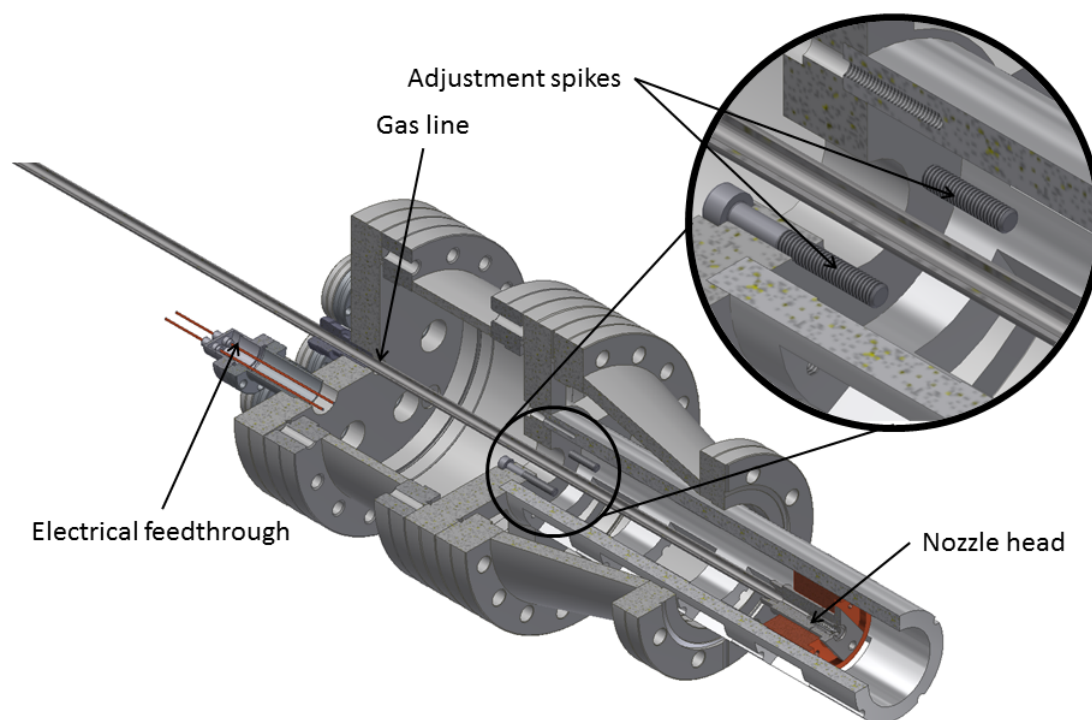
Schematic representation of the adjusted nozzle mounting assembly. To adjust the General Valve tension the nozzle is pulled back onto two screws mounted on the flange, which stick into the nozzle mount and provide resistance so that the nozzle can be adjusted.
